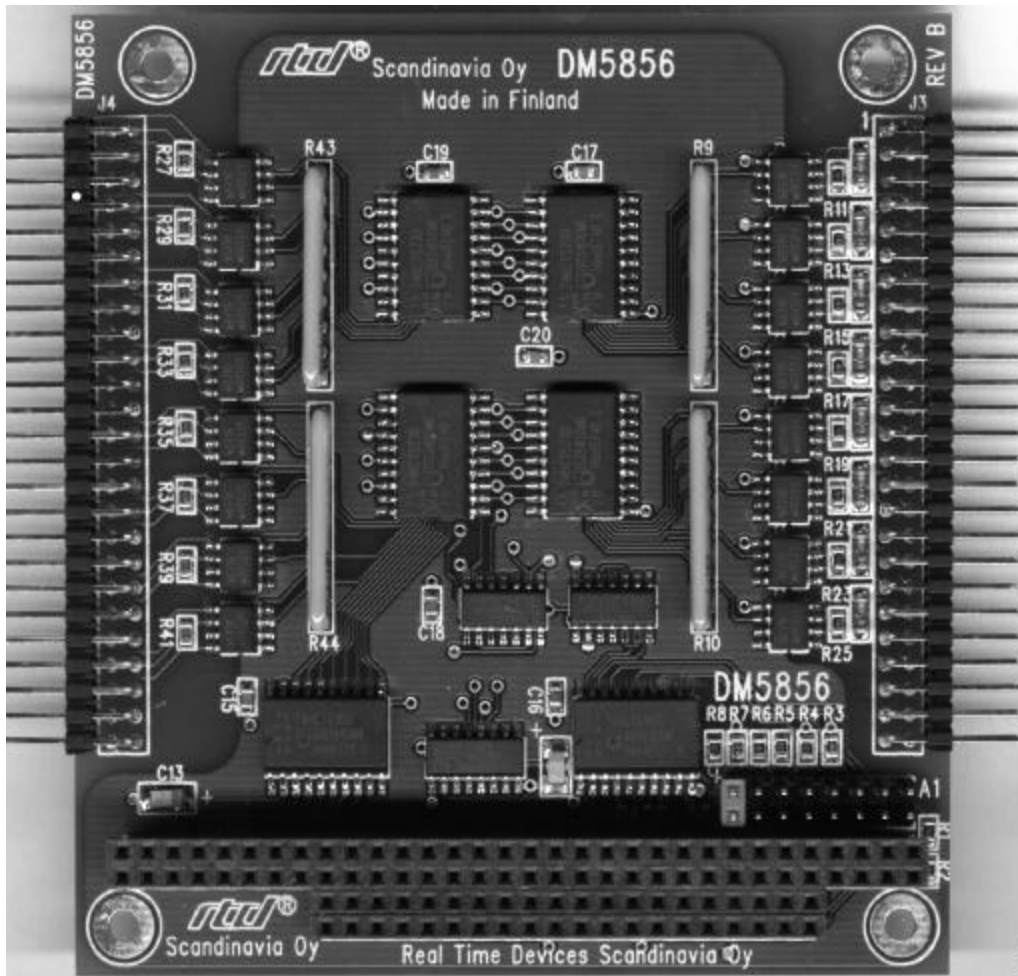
Board layout showing jumper locations (Figure shows DM6856 board)
